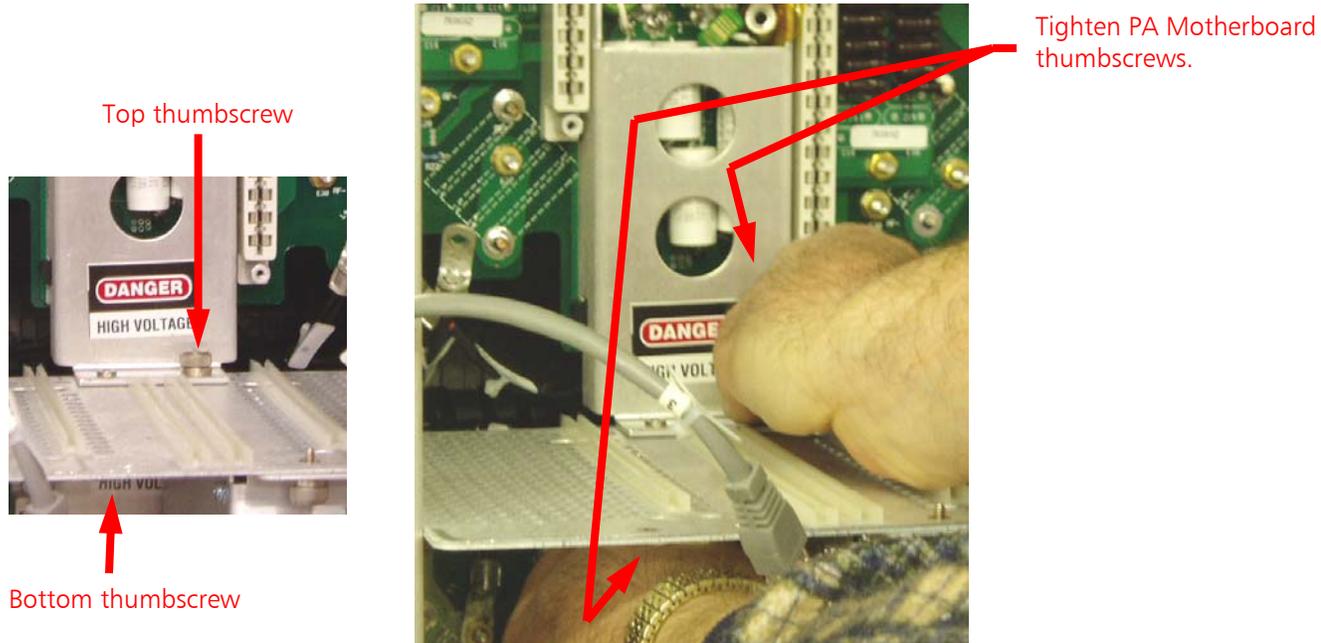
Tighten PA Motherboard Bracket Thumbscrews
